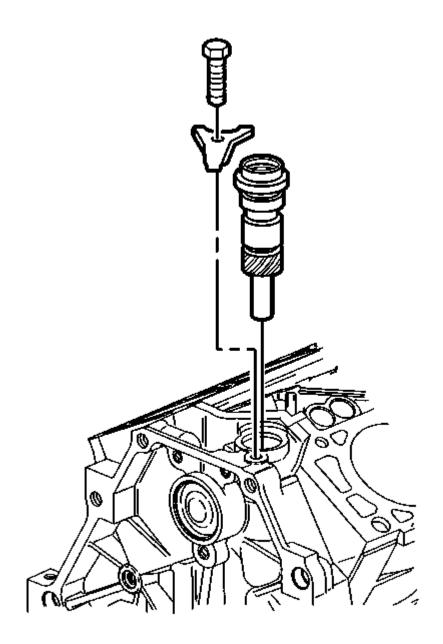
View Of Oil Pump Drive Courtesy of GENERAL MOTORS CORP.
